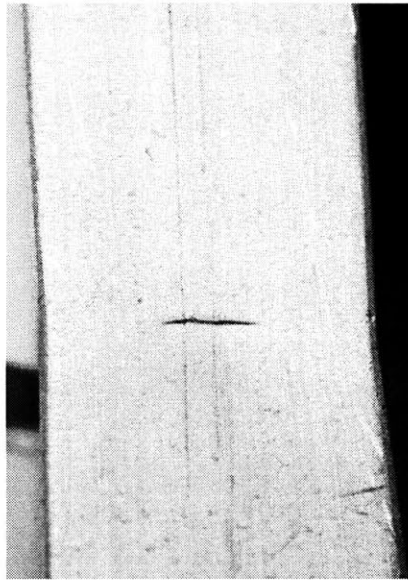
TSCCT specimen: crack initiation and propagation on the flange of the T-type extruded stiffener
